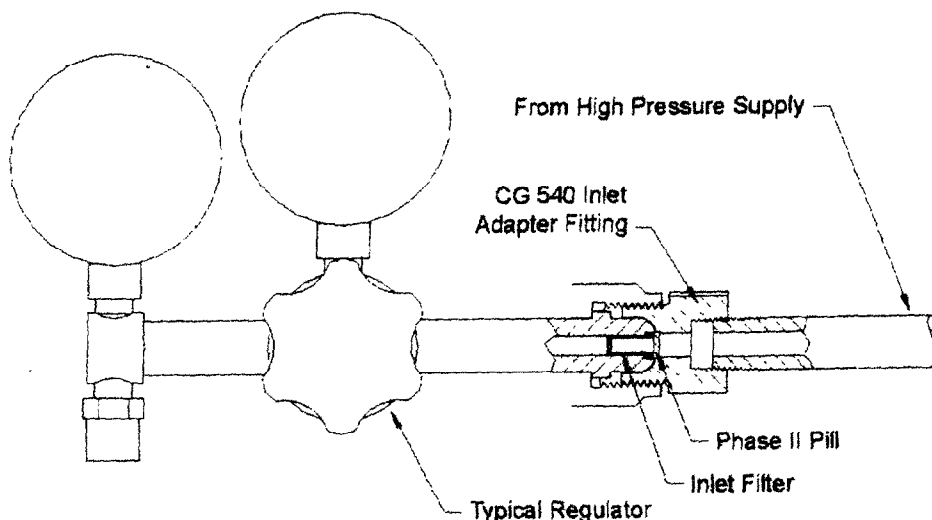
Typical Phase 2 Ignition Pill Installed in Regulator with CGA 540 Adapter Fitting
